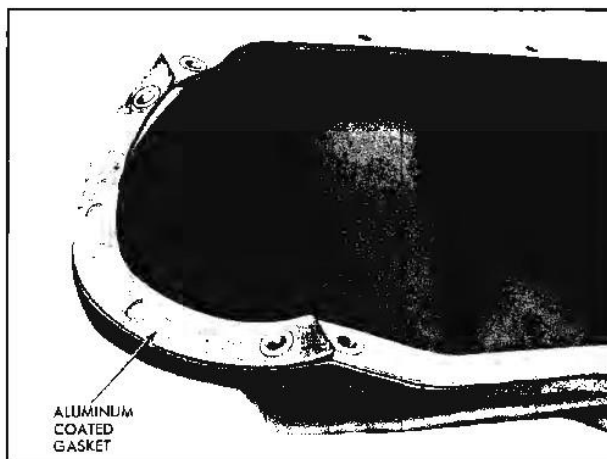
Front Oil Pan Gasket Overlapping Side Gaskets
